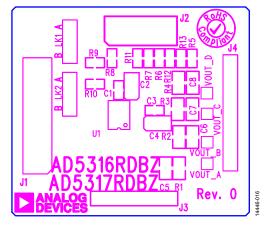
EVAL-AD5316RDBZ Daughter Board Component Placement
